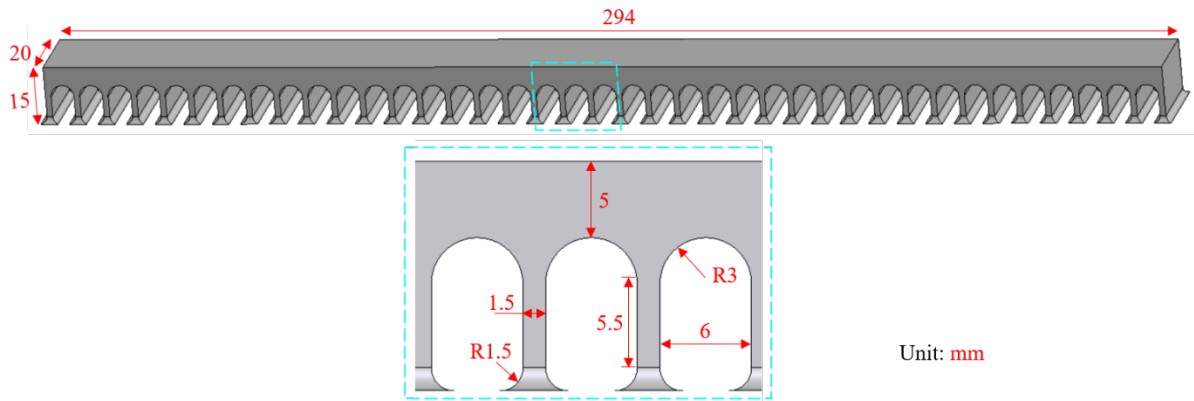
Geometric dimensions of the bridge component fabricated by LPBF.
